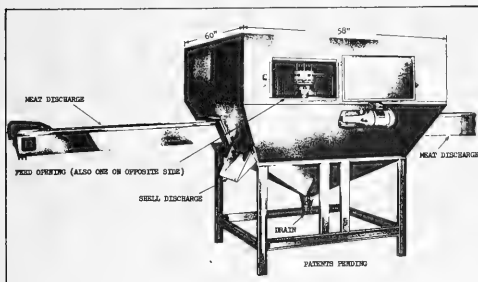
Sketch of crab-picking machine. Shows some detail of the various parts of the machine.
